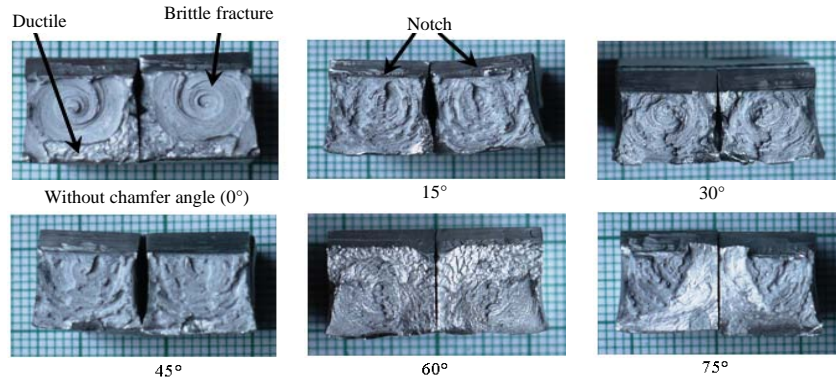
Fracture surfaces of impact strength specimens of A6061 CDFW joint with various chamfer angles
